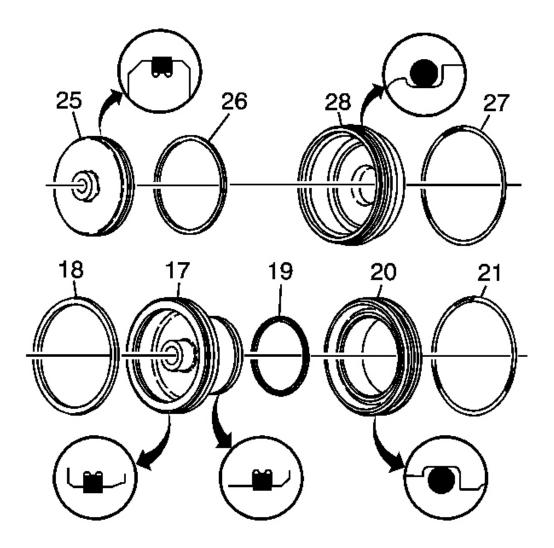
View Of 4th Apply Piston, 2-4 Servo Cover, 2nd Apply Piston, & Servo Piston Inner Housing
